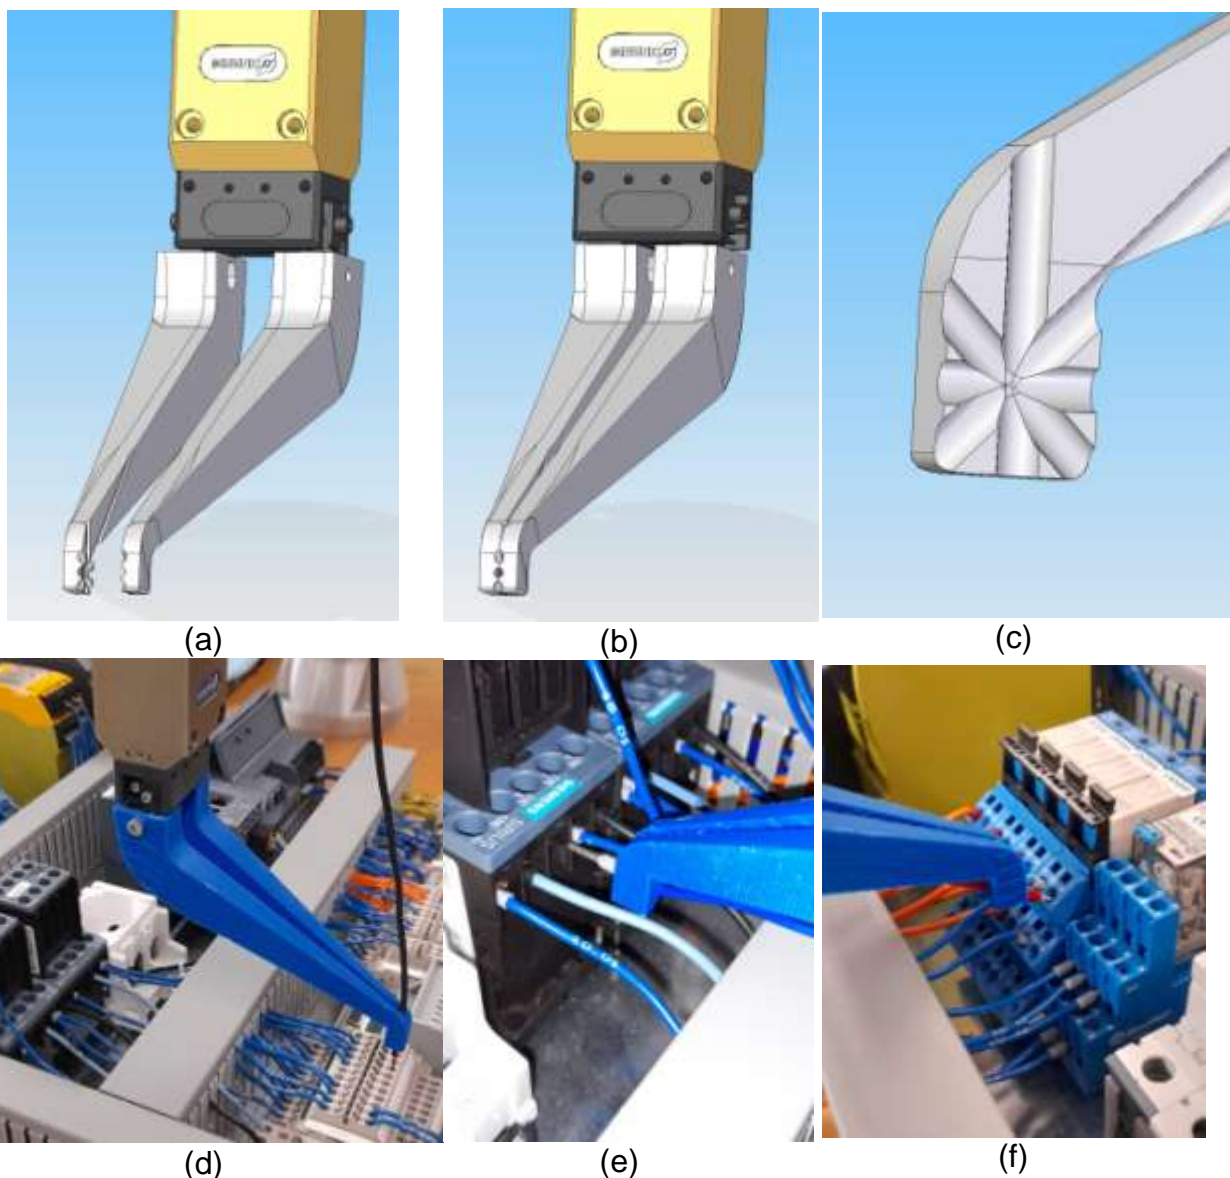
CAD design of the fingers for cable connection in UC1 in open position (a), and in closed position (b), detailed view of the finger pad with grooves for cable holding (c), the finger prototypes inserting a cable in vertical direction (d), horizontal direction (e) and at 45 degrees (f).
